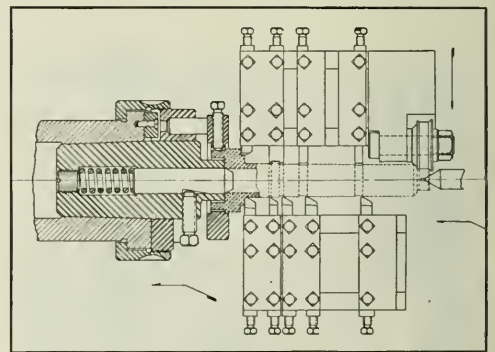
Finish-turning Operation on the Shaft shown in Figs. 6 and 7
